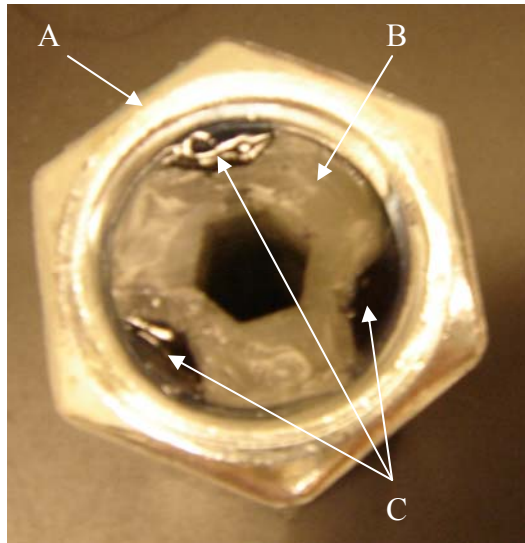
Top view of the mold (A) with solidified PP structure (B) and filled alginate pockets, using a purple gelatin model material (C).
